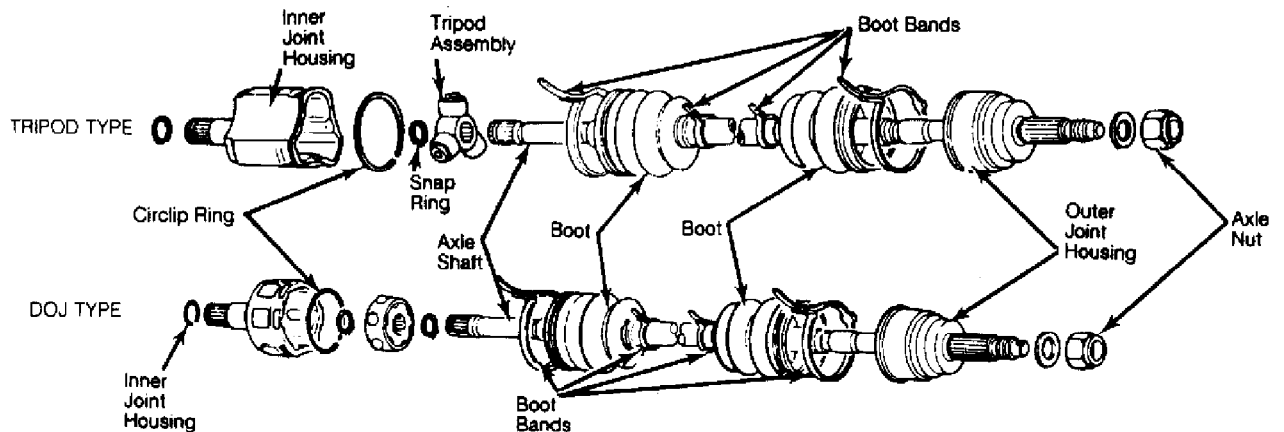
Exploded View Of Axle Assemblies (DOJ & Tripod)
